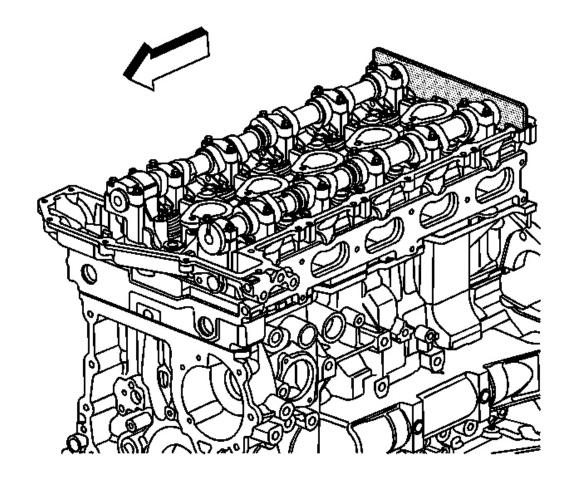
View Of J 44221 Installed On Camshafts Courtesy of GENERAL MOTORS CORP.
